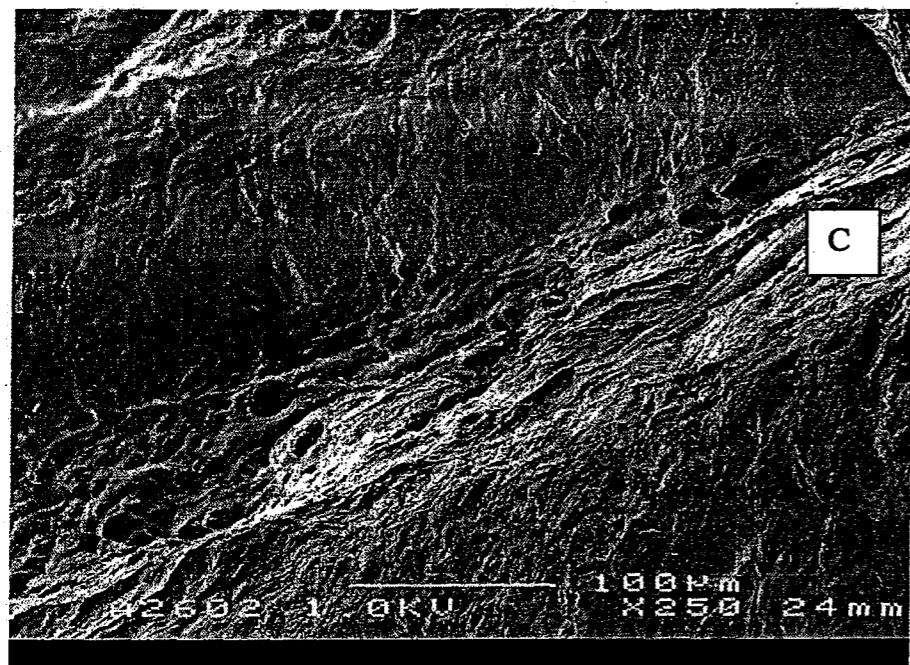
Voids at crack tip on fracture surface. Smooth section on fracture surface indicates fracture to be a result of breaking open of specimen (316L stainless steel – Batch A) (crack growth to the top of the page and left)).
